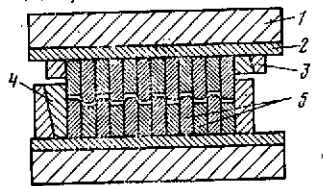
Transverse section of the flexible die. 1 -- plate; 2 -- insert; 3 -- clamp; 4 -- wedge; 5 -- plates.
